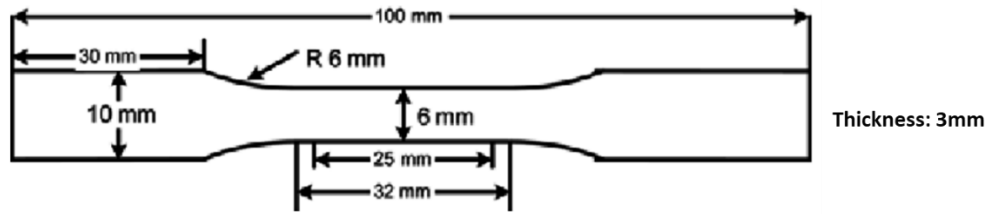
ASTM E8m sub-size tension test specimen dimensions [75]
